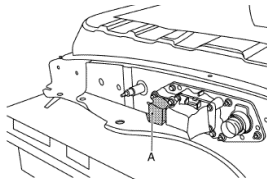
Preventing air leaks from the PTC wiring harness socket
